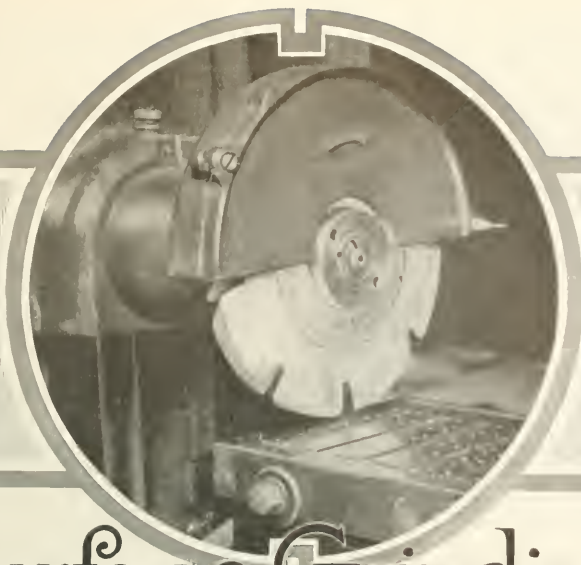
The Wheel Truing Device set up on Grinding Machine ready for use
